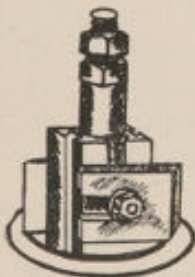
Example of Encased Gear-wheels on Wood-Planing Machine.
